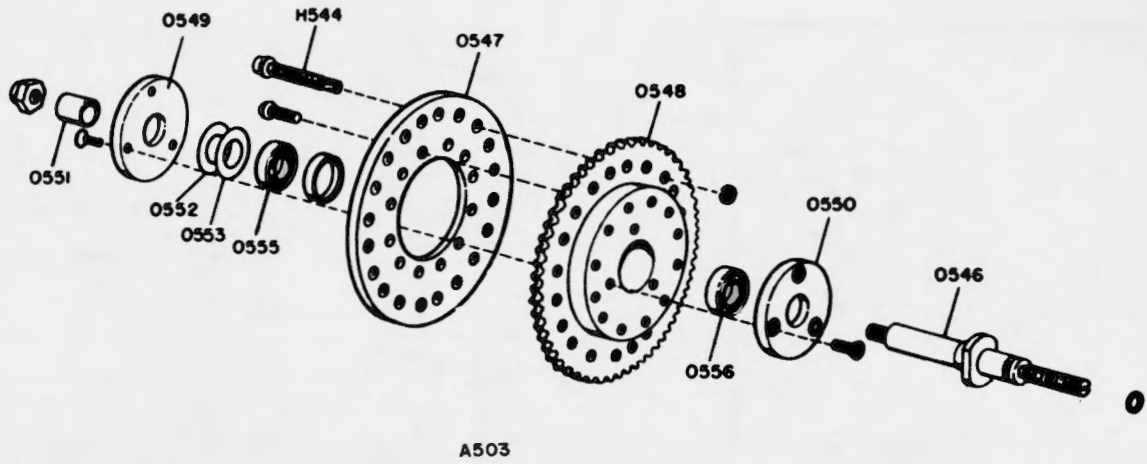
AM-1565/URC, Output Loading Adjustment Subassembly, Exploded View
